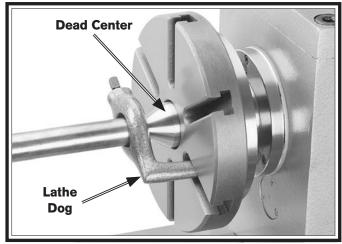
Example photo of using a dead center with a faceplate and lathe dog.
